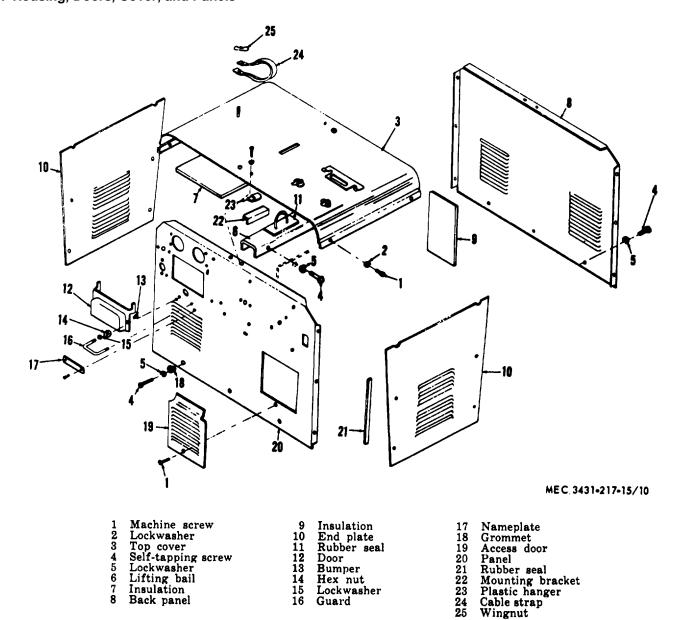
Housing, cover and panels, removal, disassembly, and installation.
